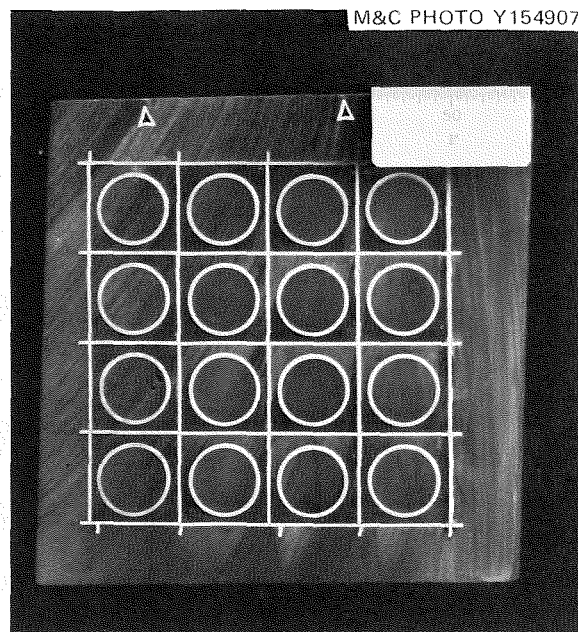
Section through upper grid of B-2 at 63.8-cm elevation.
